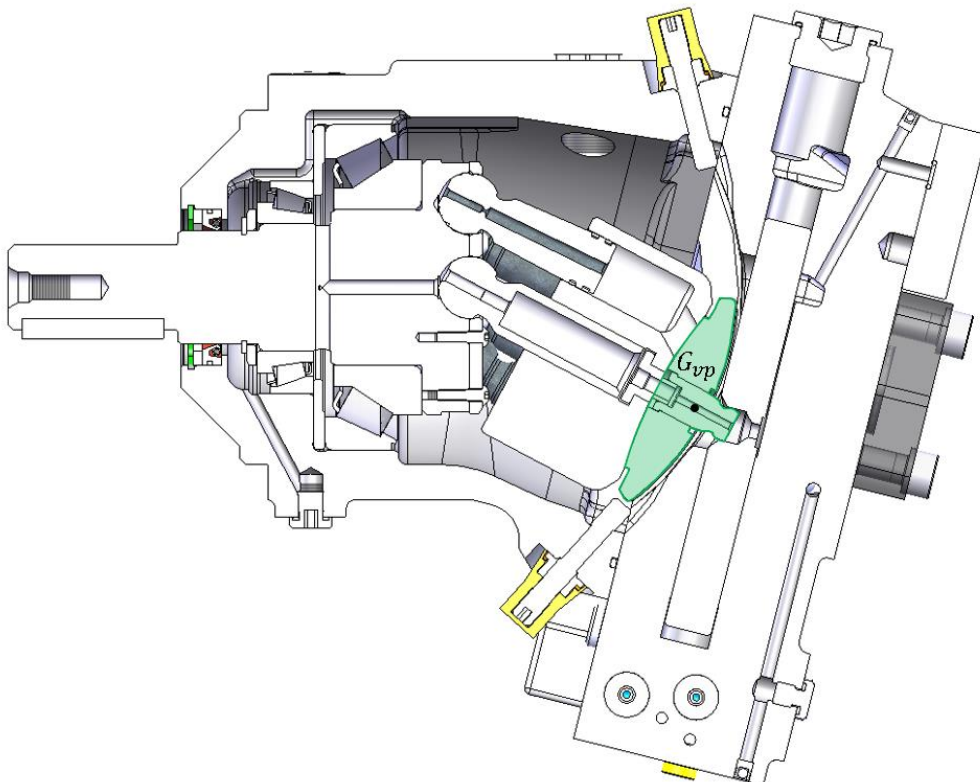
Valve plate for variable displacement in the bent axis unit section
